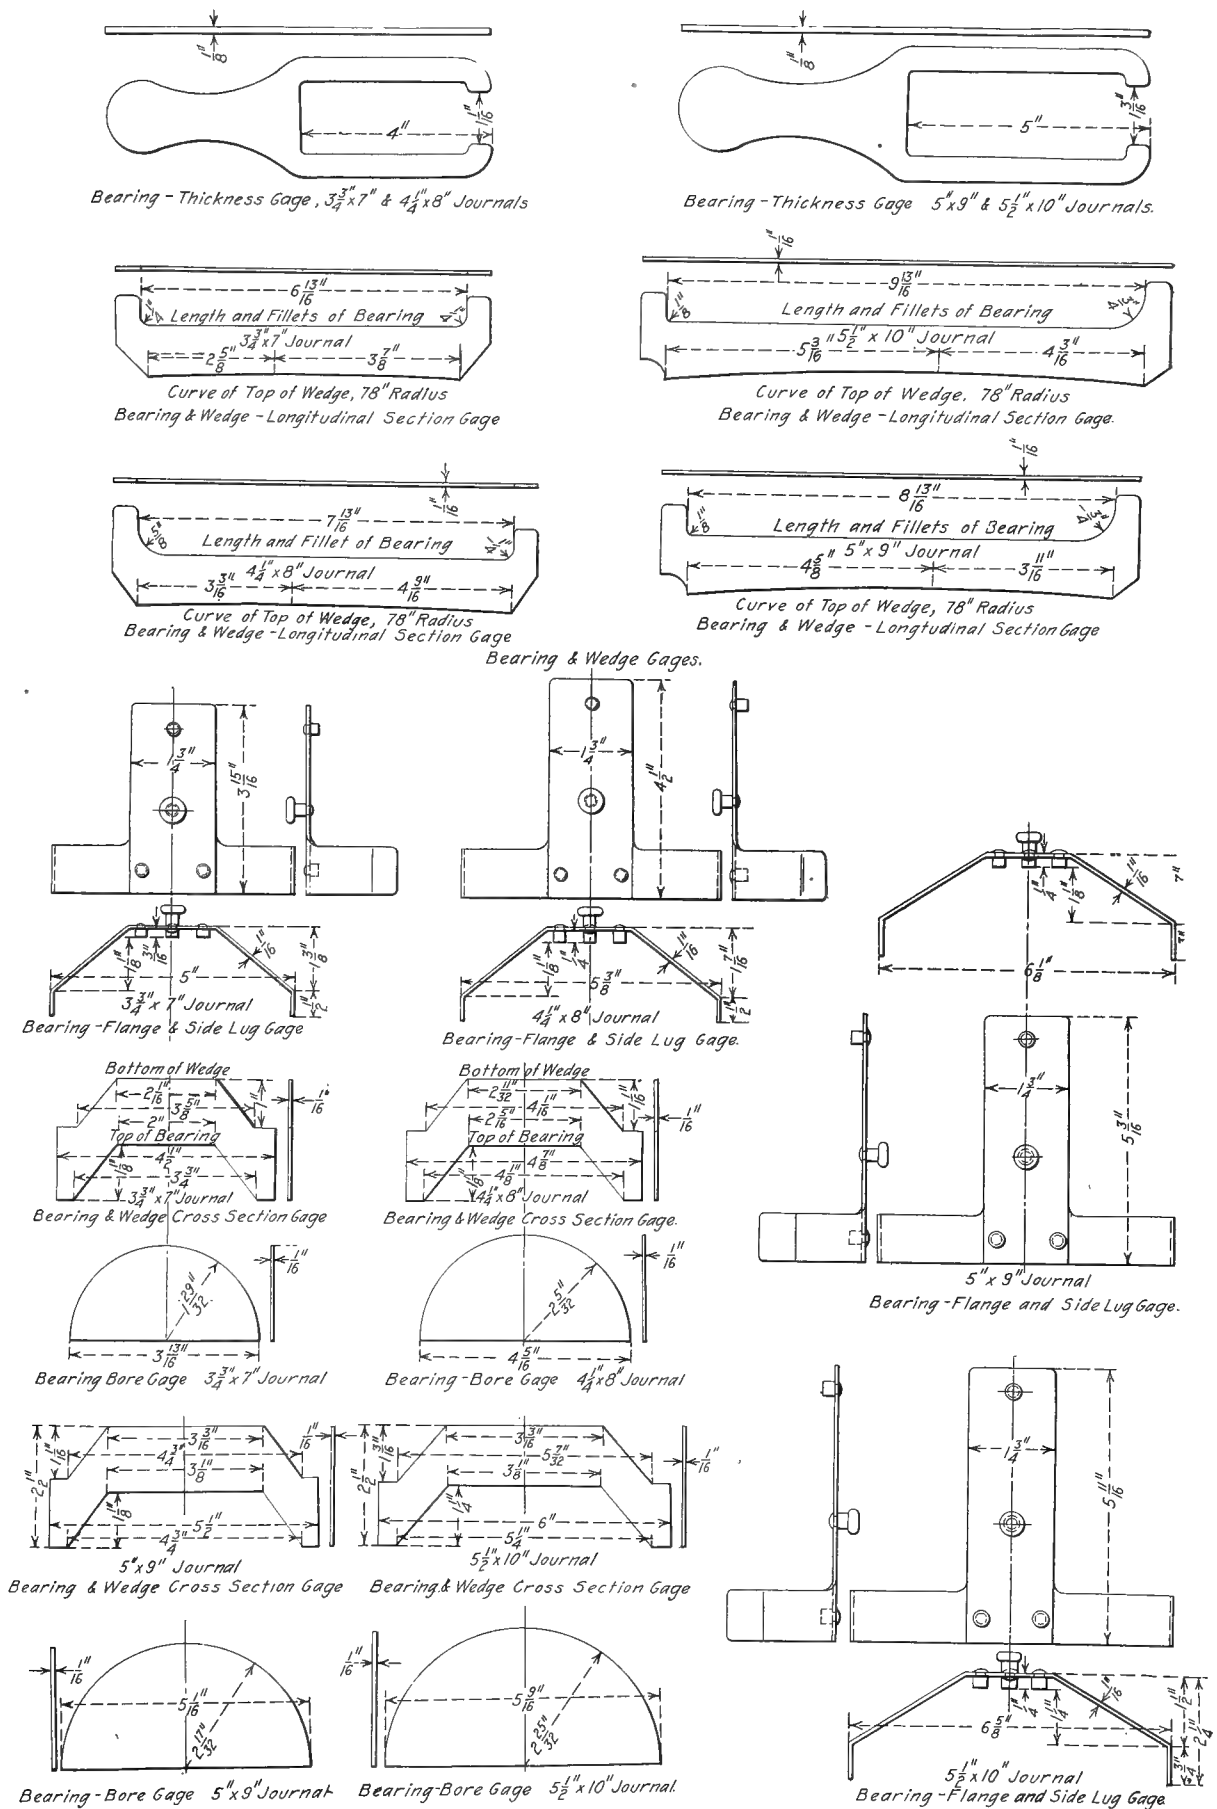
Journal Bearing and Wedge Gages. (M. C. B. Sheet 14.)
